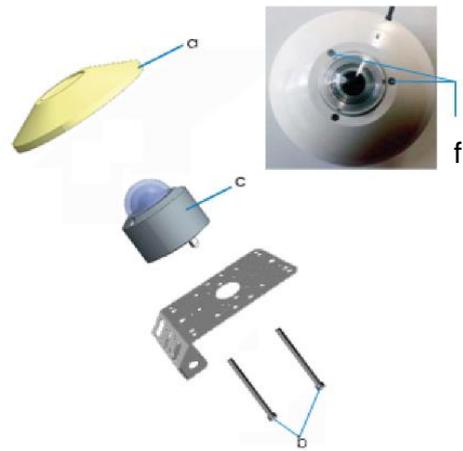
Pyranometer on mounting device with screws, b, inserted from below
